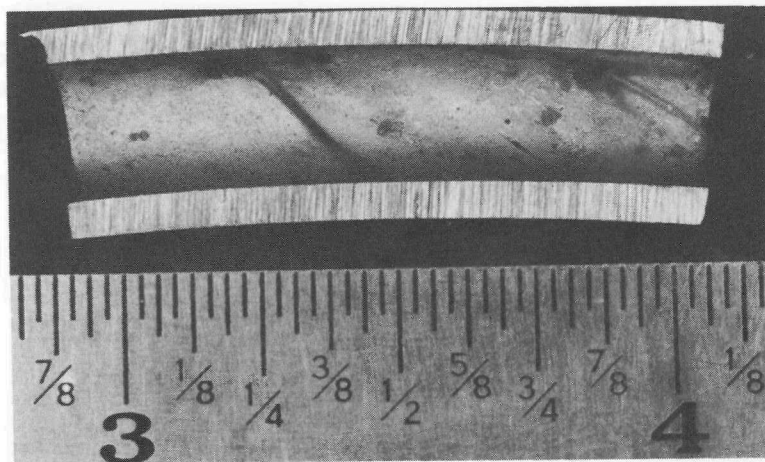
Type 347 Stainless Steel Inside Surface of Tube At Same
